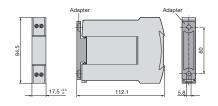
SINEAX TI 807-5.... (housing N17) with adapter for wall mounting
